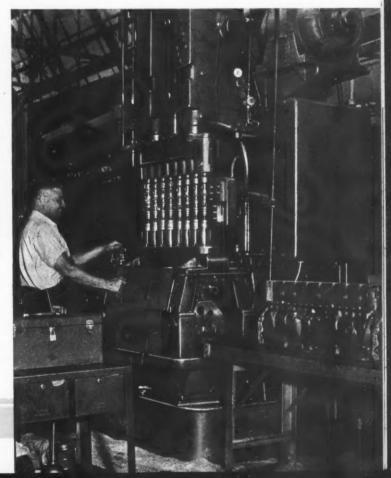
The Cylinder Bores of Engine Blocks are Honed on Barnes Eight-spindle Vertical Machines. About 0.001 Inch of Material is Honed from the Bore Diameter feature of the fixture prevents the tools from scoring the bores while they are being withdrawn. Previously, in using fixtures without this feature a tool mark as deep as 0.003 inch was produced in the cylinder bore when the tool was retracted, necessitating much more frequent tool grinding.
